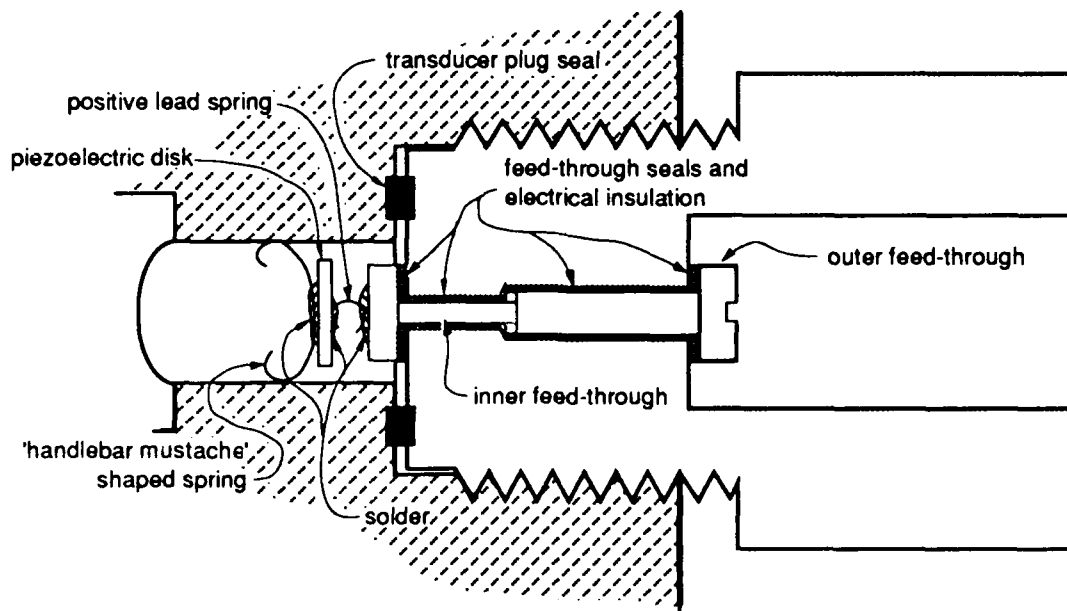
ENLARGED CROSS SECTIONAL VIEW OF MOUNTING FOR TRANSDUCERS. SCALE IS 2:1.
